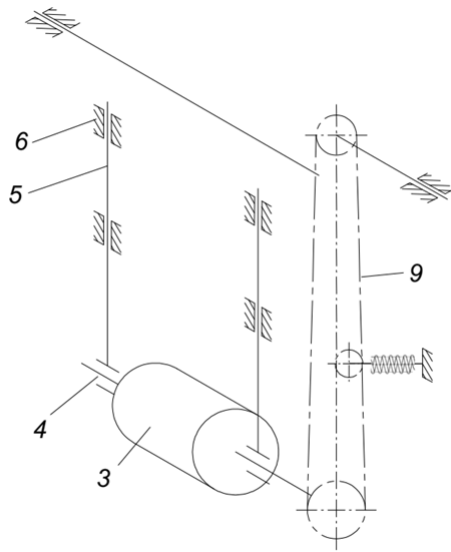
Option of a drive for the upper working rollers 3 - upper working roller, 4 - support of the upper working roller, 5 - rod, 6 - guide support, 9 - drive of the upper working roller
